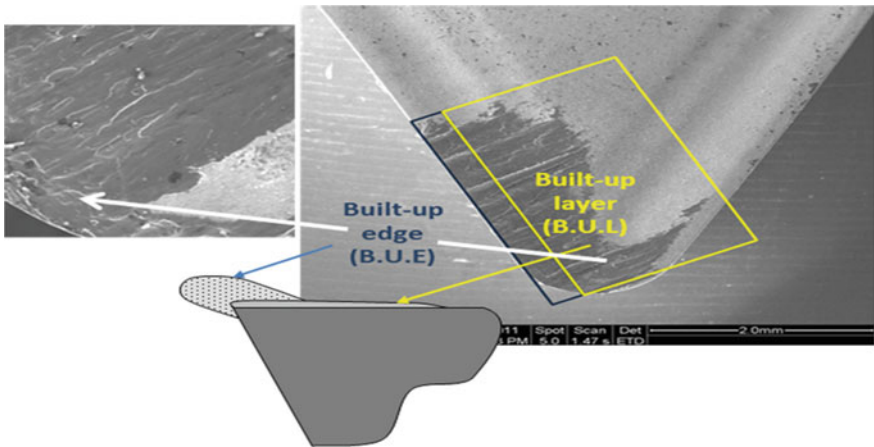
SEM image of a turning insert's edge and tool rake face after dry machining the UNS A97050 alloy [22]
